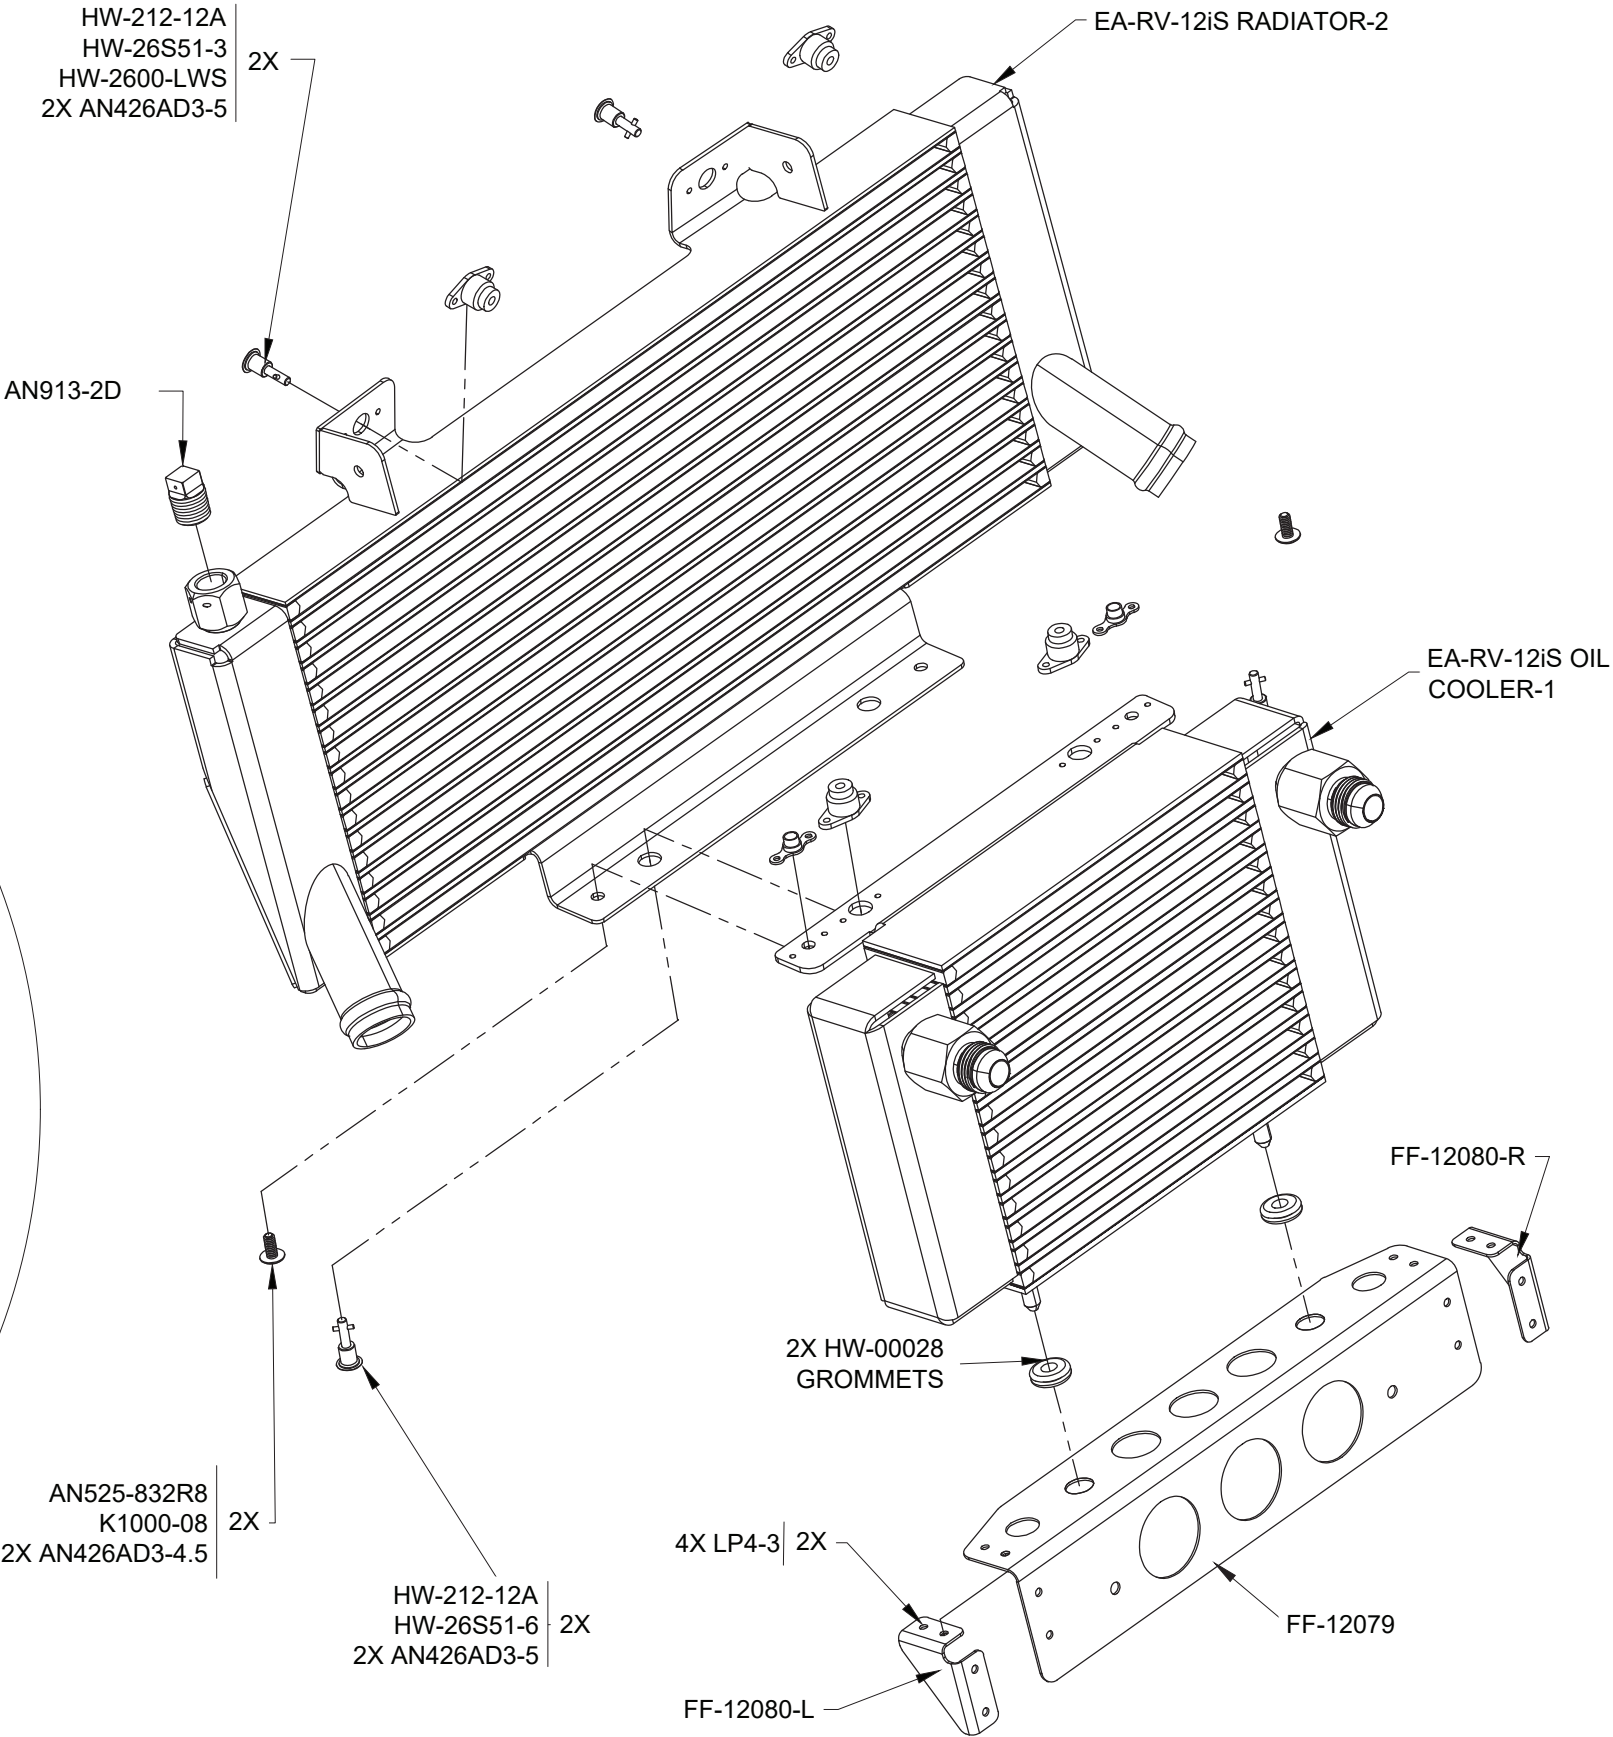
OIL COOLER AND RADIATOR ASSEMBLY
